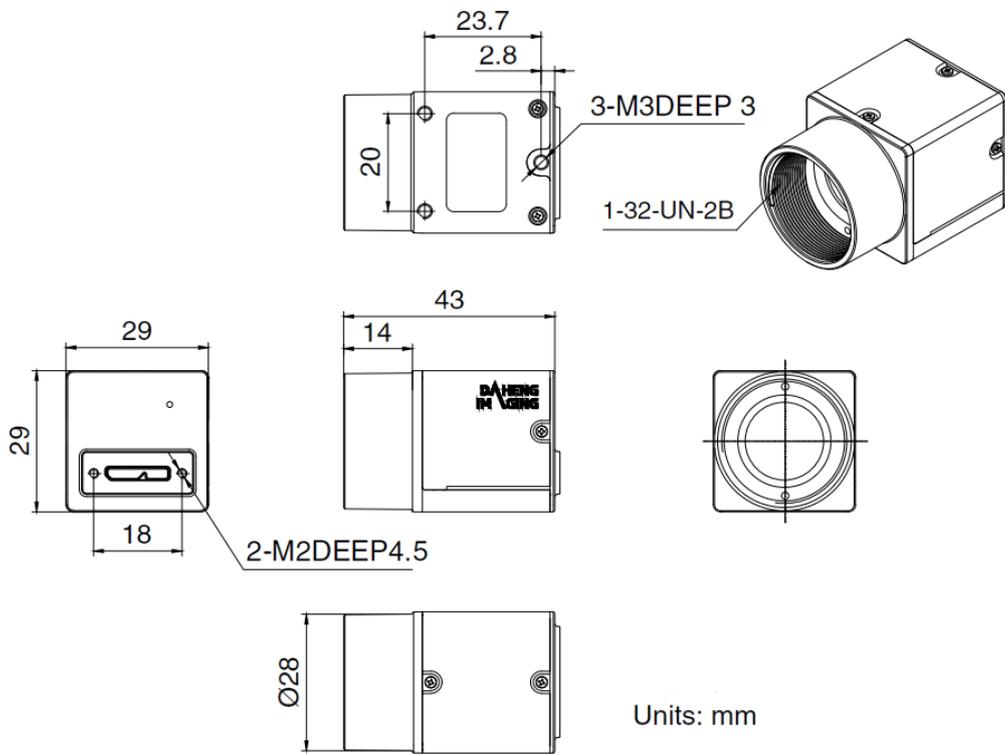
MER2-U3-L-6P mechanical dimensions
